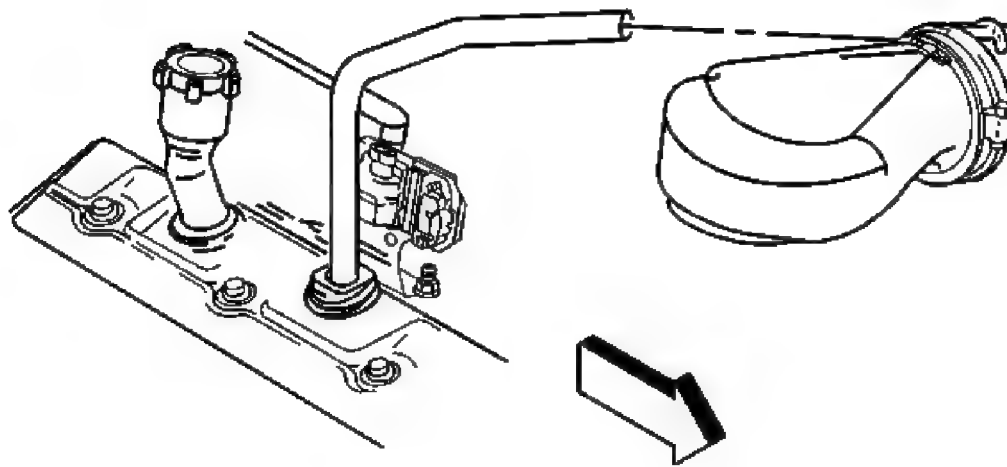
View Of Breather Tube At Air Cleaner Outlet Duct
